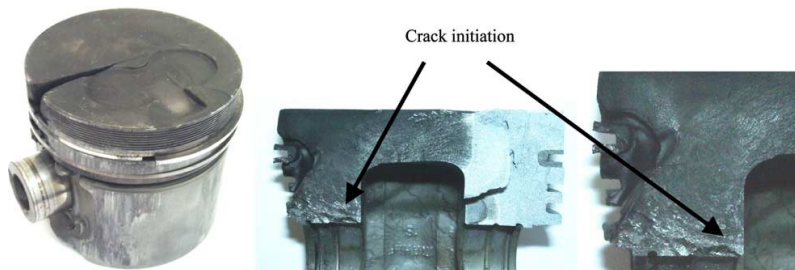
Engine piston with cracks formed at the piston pin boss. [30]
